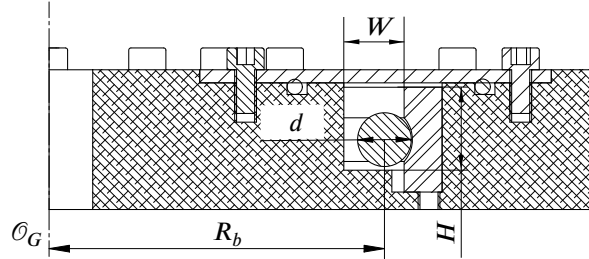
Half-section of the discoidal rotor containing the outer ring of a ball-bearing.
